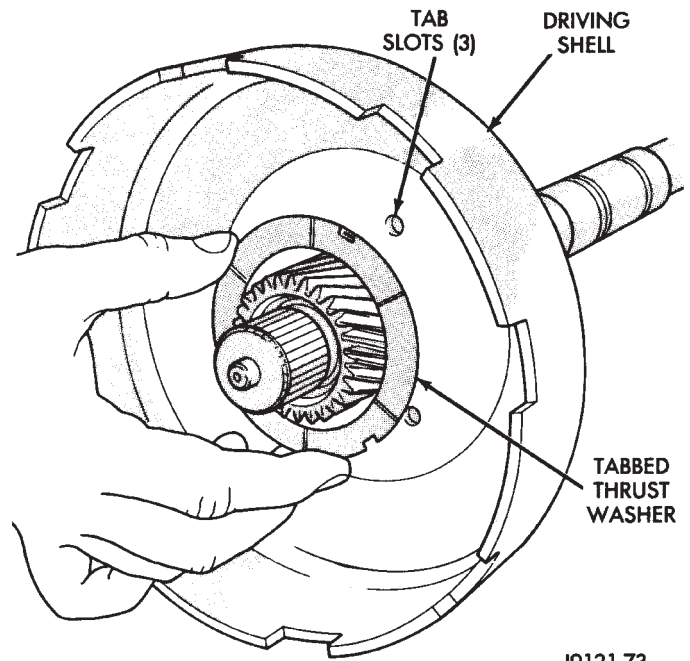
Installing Driving Shell Thrust Washer—46RH
